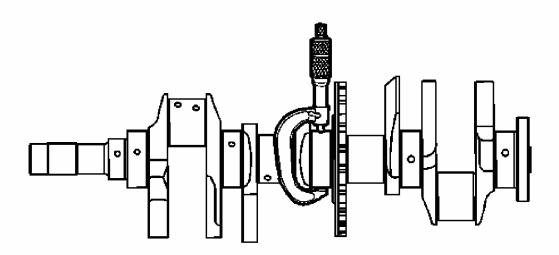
Checking Size Of Crankshaft Main Journals Courtesy of GENERAL MOTORS CORP.
